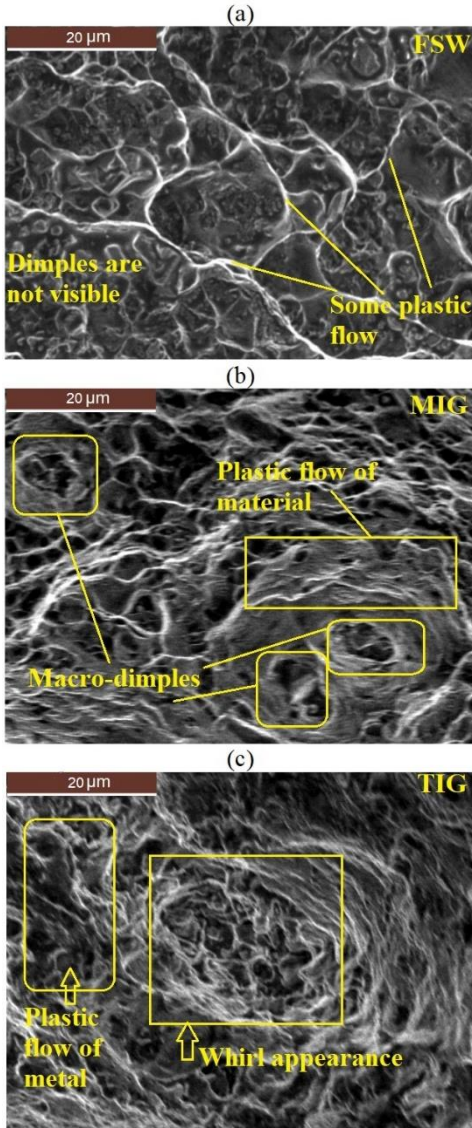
Fractography analysis of welded joint: (a) FSW joint; (b) MIG joint; (c) TIG joint
